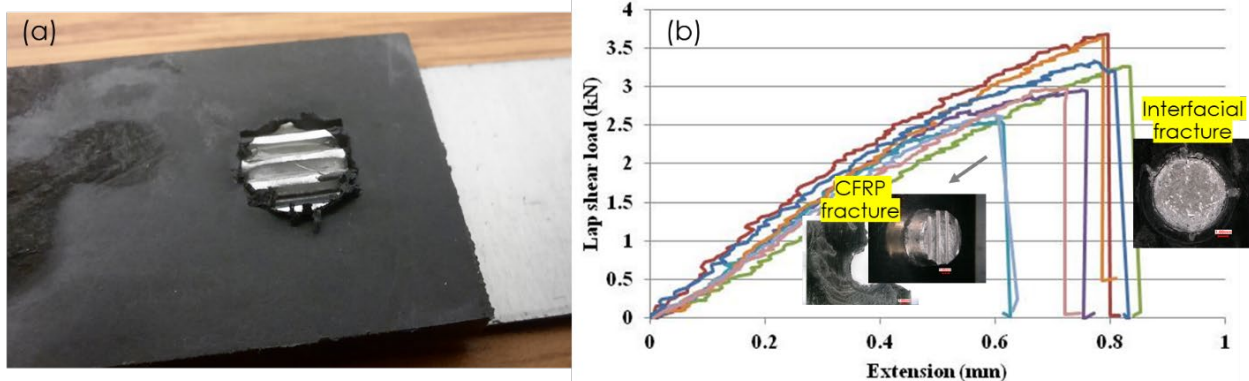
(a) Single-joint lap-shear sample welded by URJ and (b) lap-shear tensile results. Source: ORNL.
